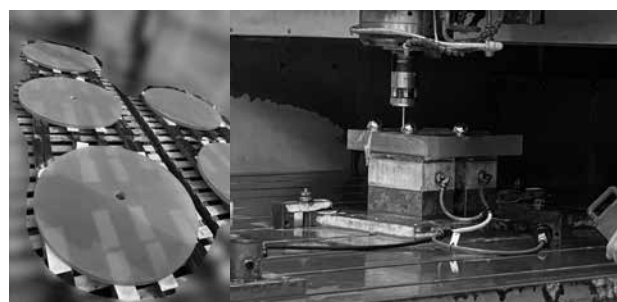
(Left) Prototype of the mirror blanks. (Right) Measurement of a hexagonal-shaped small sample mirror to evaluate the durability.
